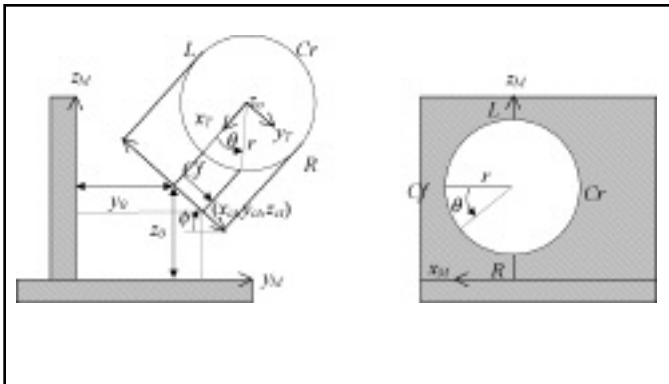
Dimensional parameters for welding wire extension end position.
